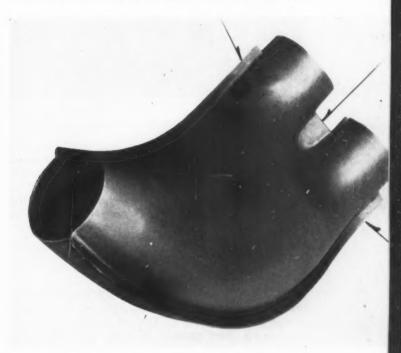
Stainless steel aircraft engine exhaust stack. The flanged edges are seam welded as indicated by arrows, while center arrow at junction between ports shows spot welds
